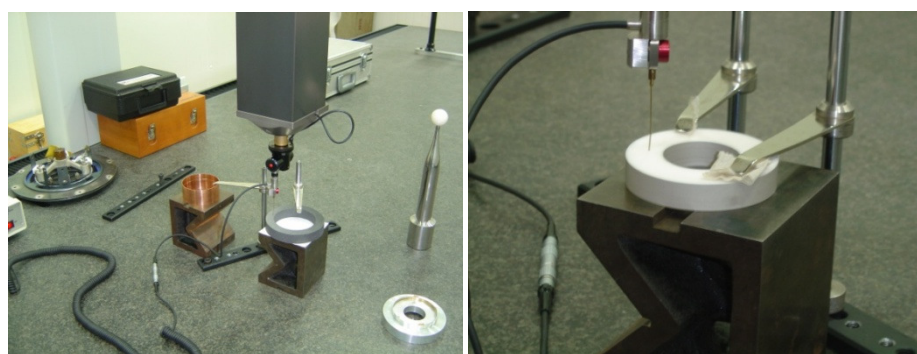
, b: Inspection of test sample components with CMM at VECC workshop
